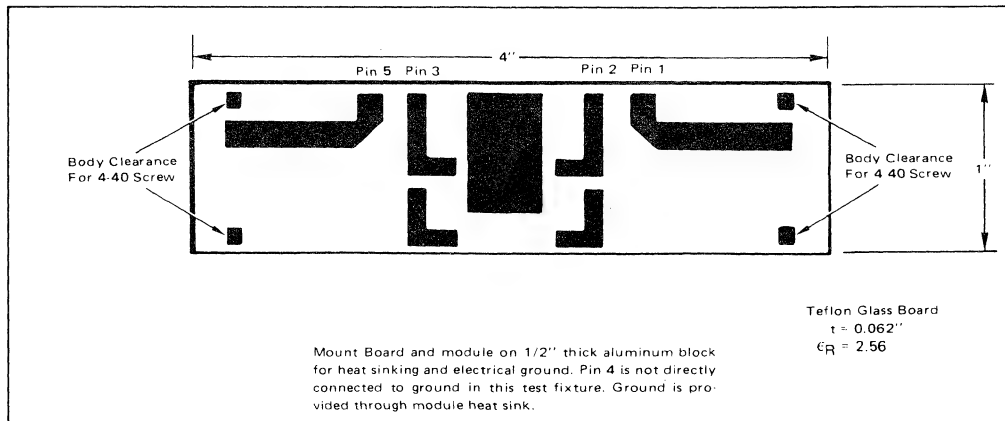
VHF POWER MODULE TEST FIXTURE
